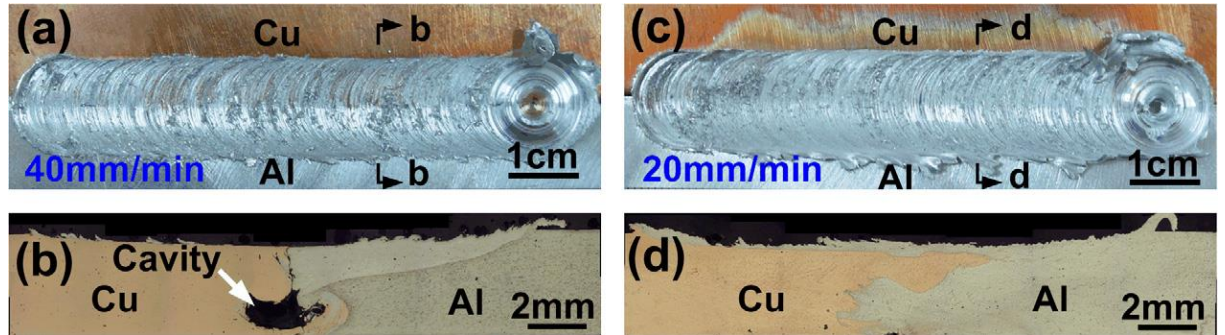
Weld appearances and cross sections of friction stir welded joints at different transverse speeds: (a, b) 40 mm/min, (c, d) 20 mm/min. <sup>[12]</sup>
